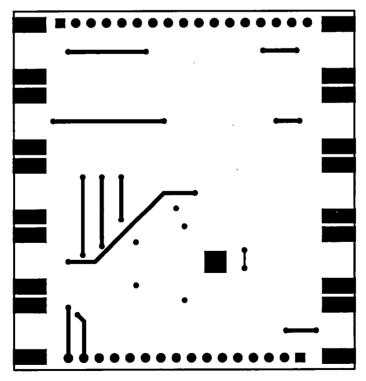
PLLCHIP1A test board layout: layer 4 (bottom)
